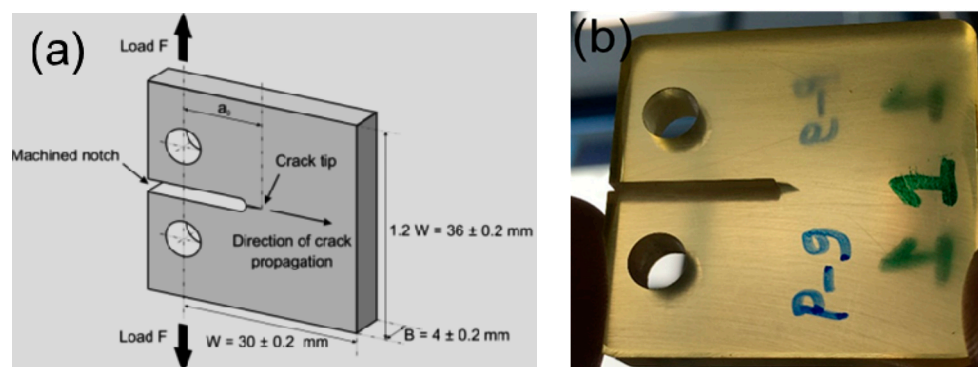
(a) Geometry of Compact Tension samples used for fracture testing in mode-I condition. (b) Photograph of compact tension sample prepared with artificial sharp crack.
